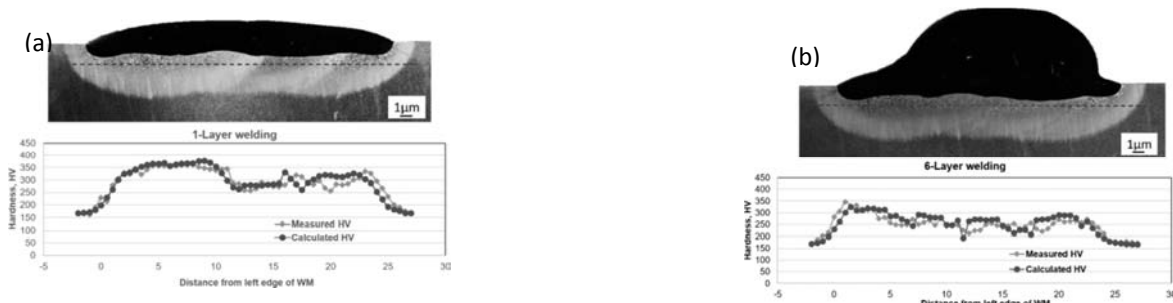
Hardness comparison after 1-Layer and 6-Layer welding of 1.5%Ni steel: (a) 1layer-3pass welding and (b) 6layer-21pass welding
